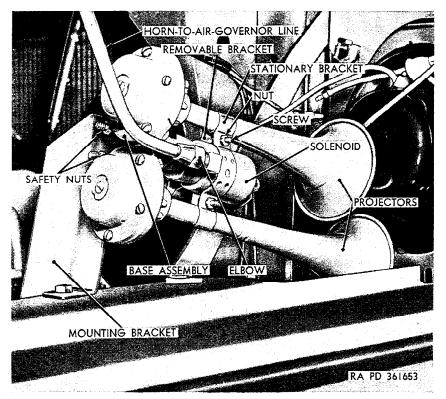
Horn installed on right front fender (solenoid with mounting brackets).
